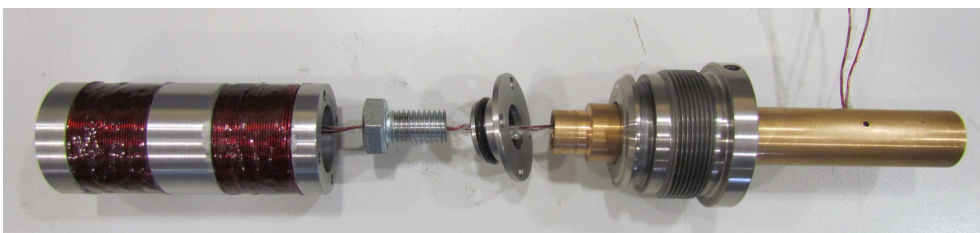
Exploded view. (From the right) Piston head, drilled screw, flange, rod and cylinder head.
